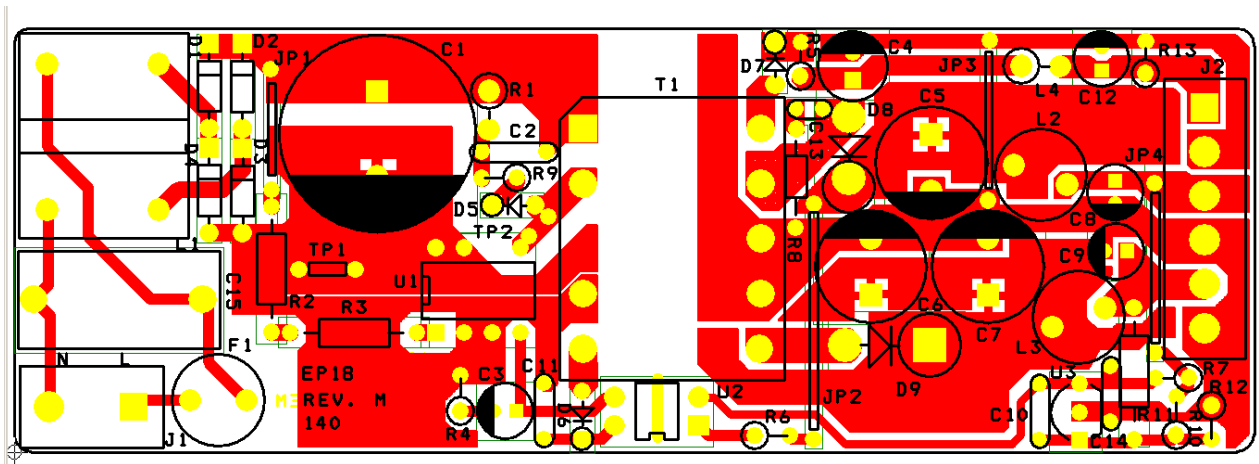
EP18 Printed Circuit Layout. Actual Size Board (L = 113 mm, W = 39 mm, H = 25 mm).
